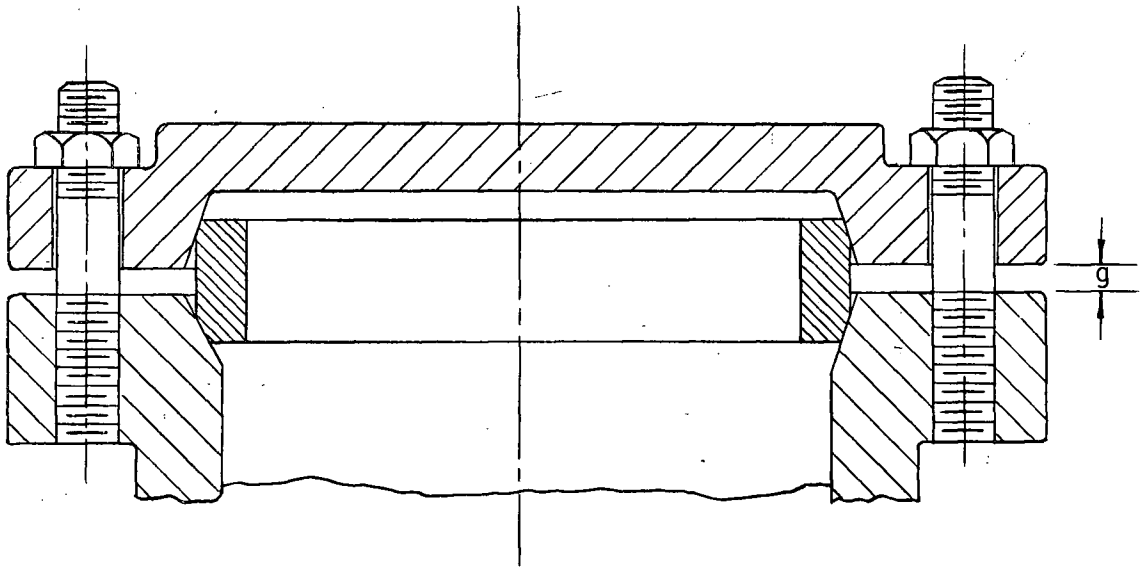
The Double-Cone Ring Gasket and Flanges Before Assembly
